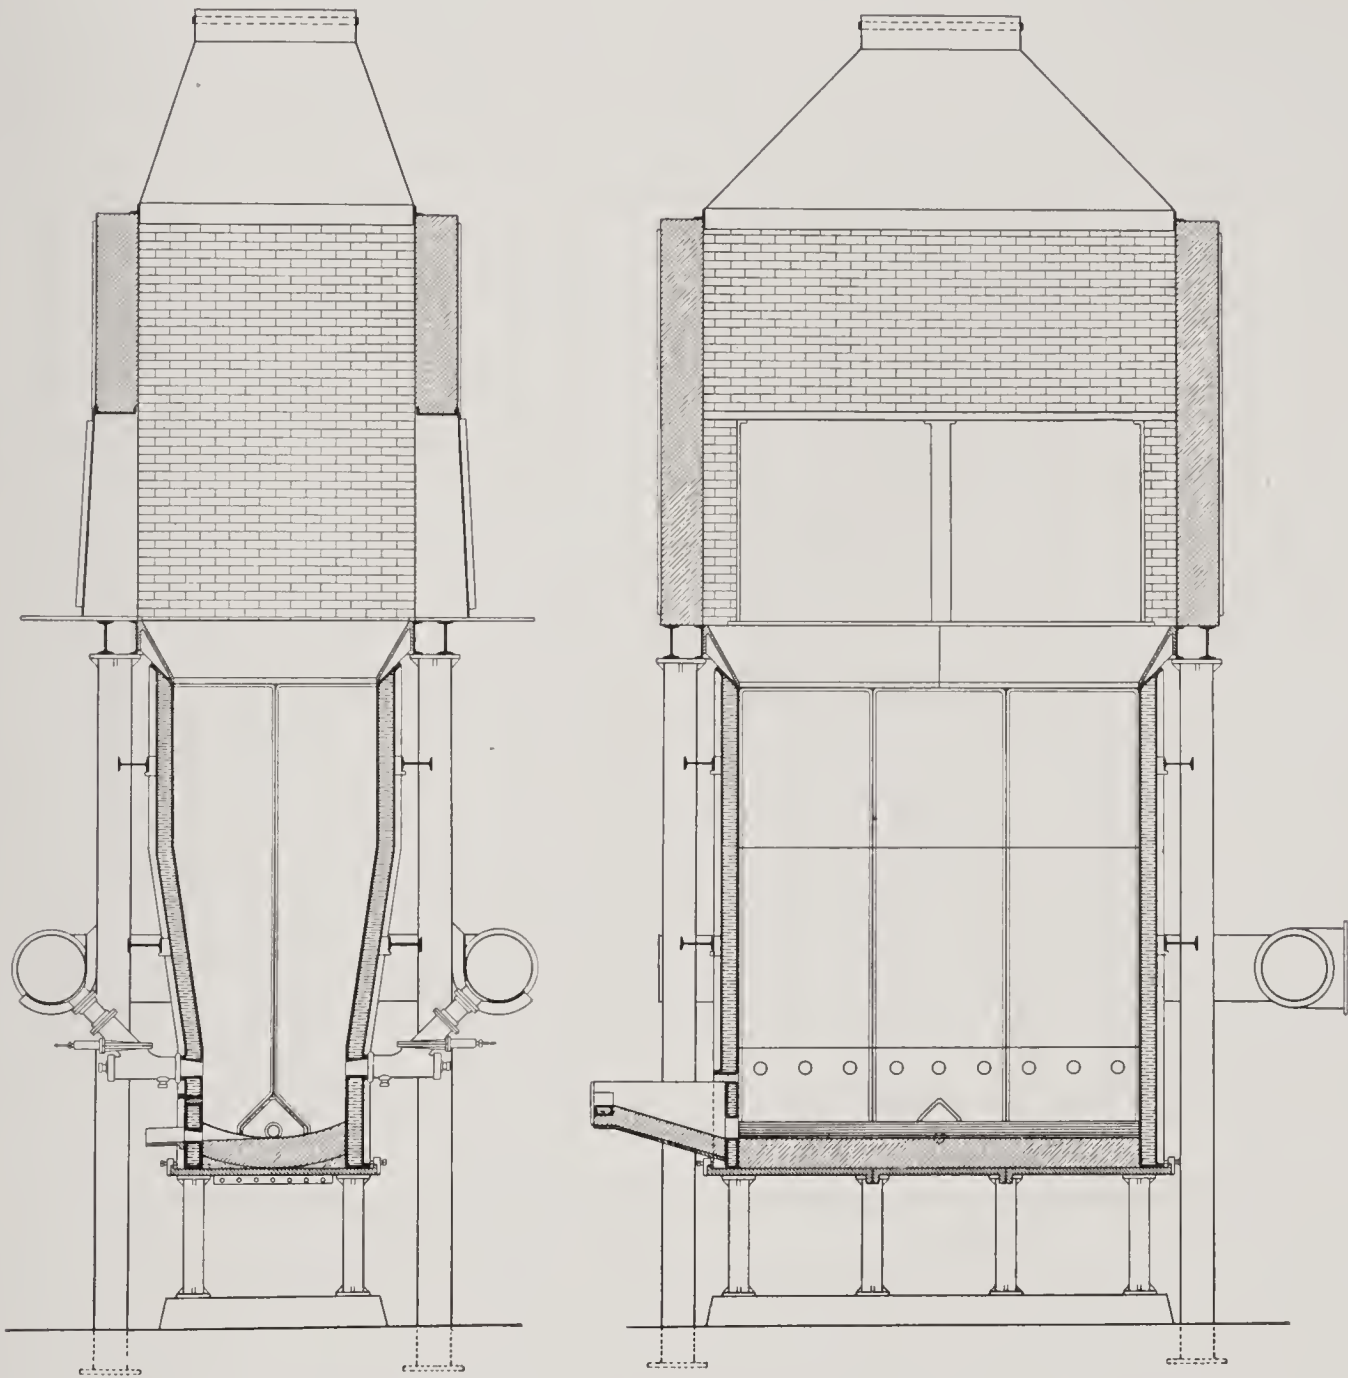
COPPER MATTING FURNACE WITH A SINGLE TIER OF JACKETS.
